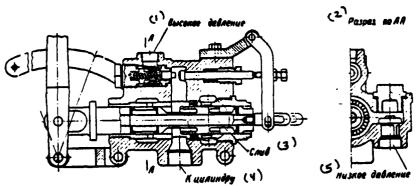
Valve, packed by sleeves, for the hydraulic system, which works with two pressures. Maximum pressure 100 kg/cm².
